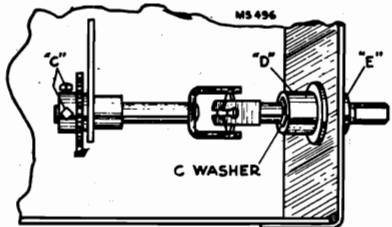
The late production range switch coupling shaft of the RCA 612V series.
